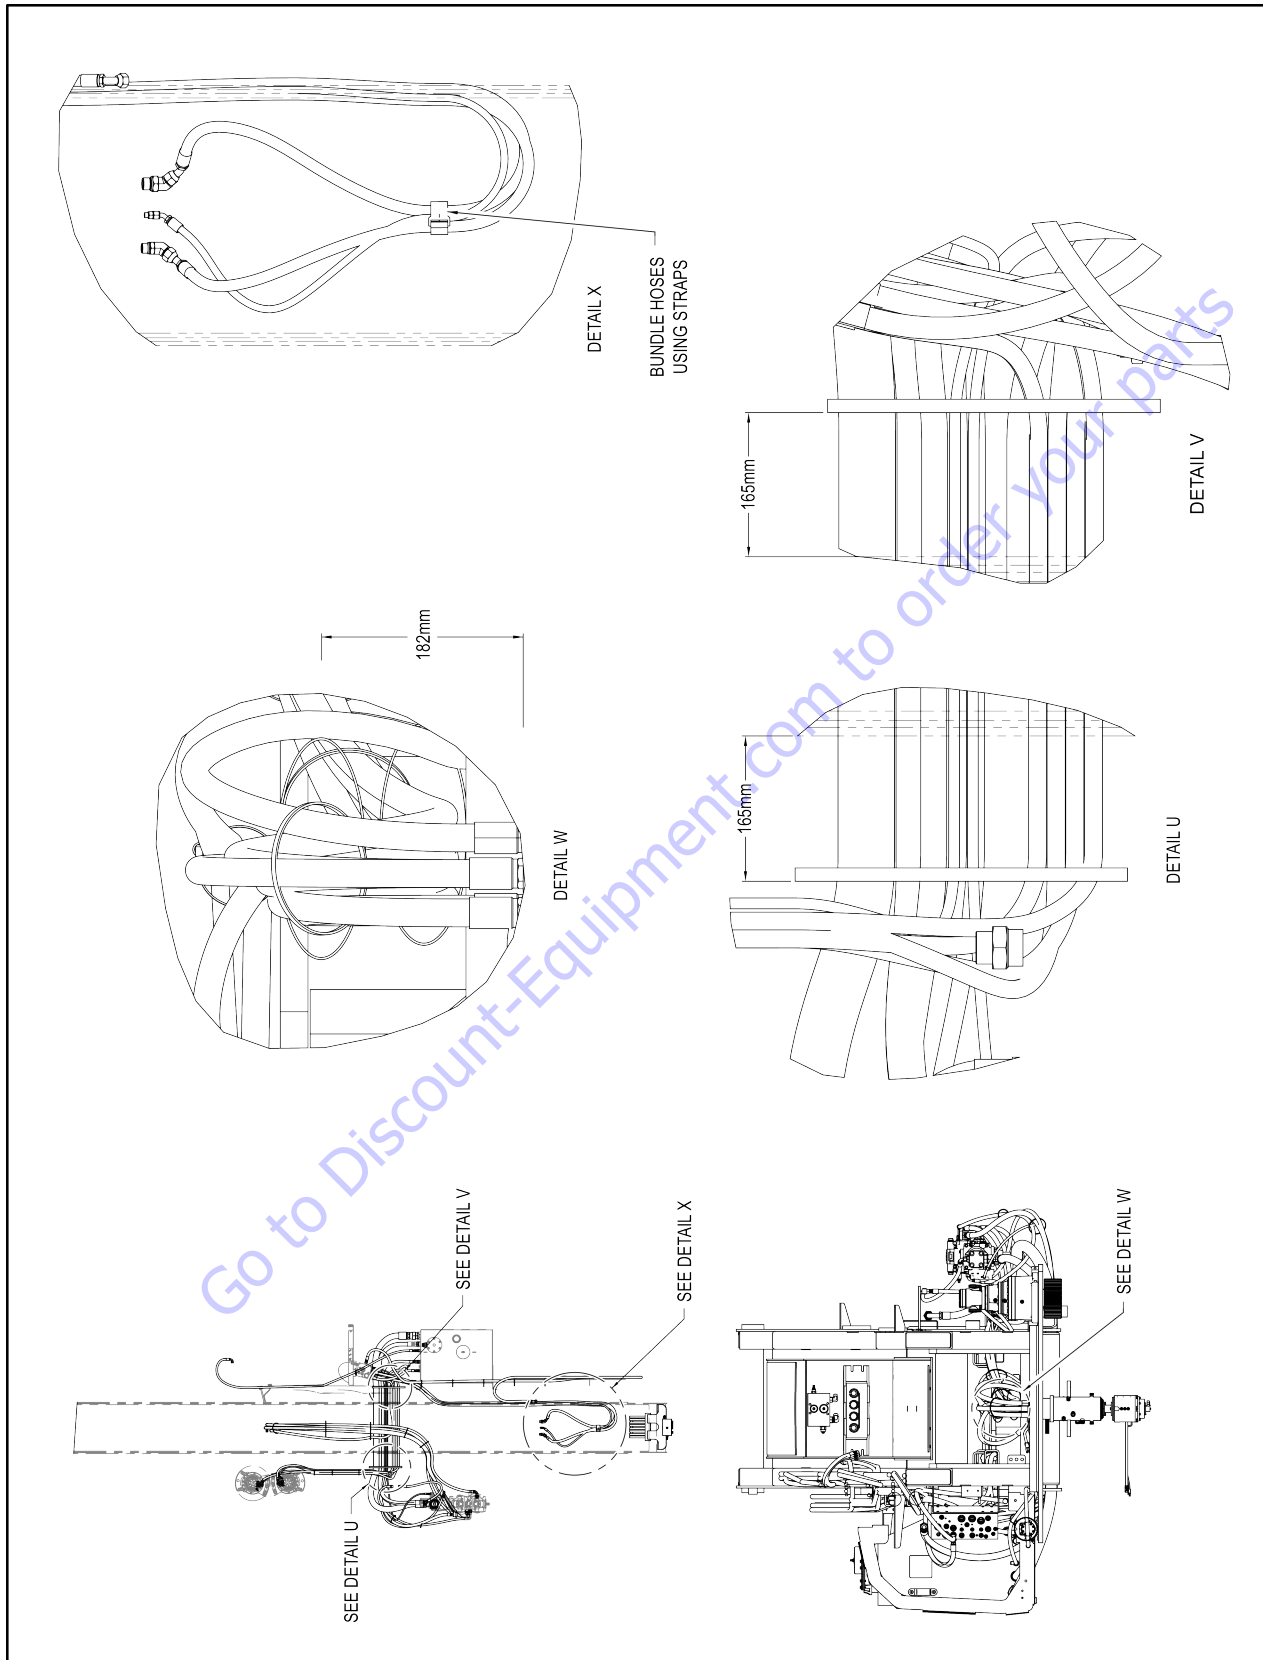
Hydraulic Hose Installation - Sheet 8 of 8
